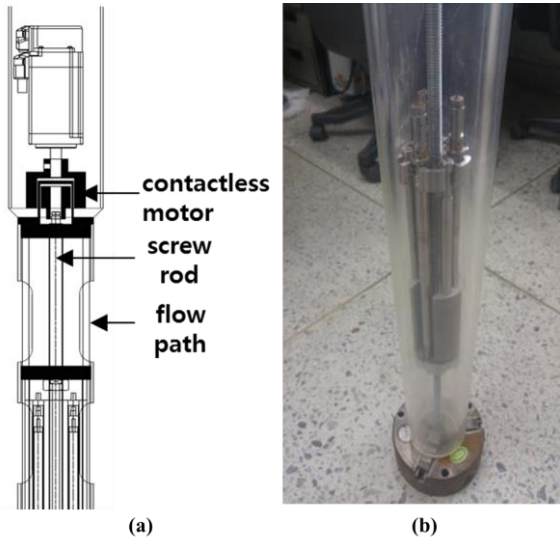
The conceptual design of test device: (a) upper structure and (b) assembly connected to screw rod
